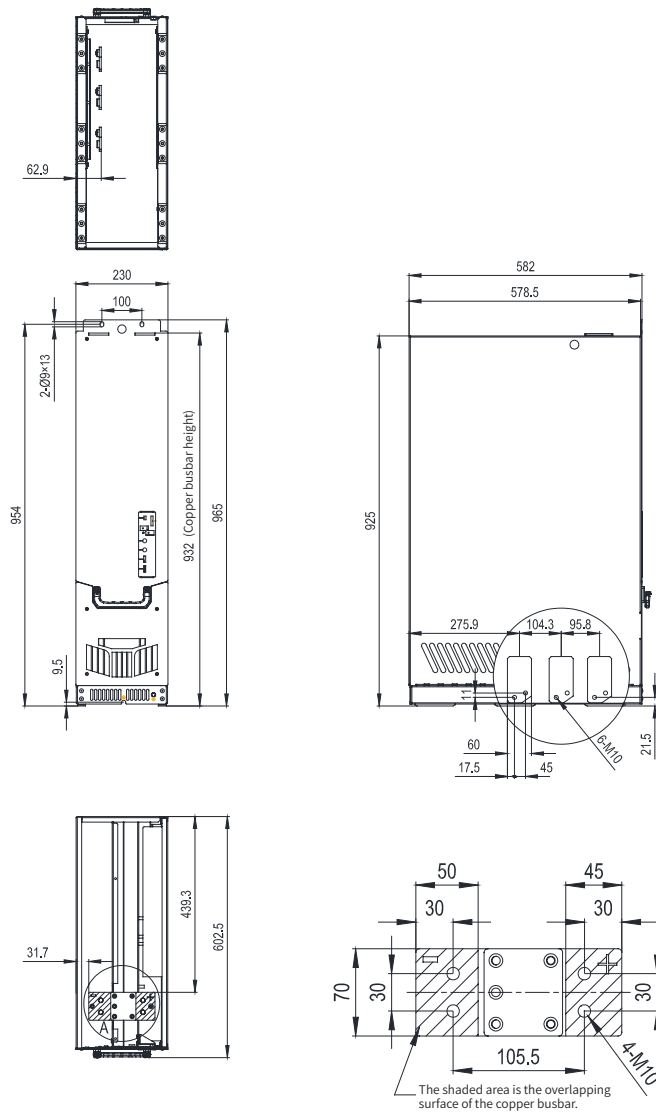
Outline dimensions of H8A DC choppers (mm)
